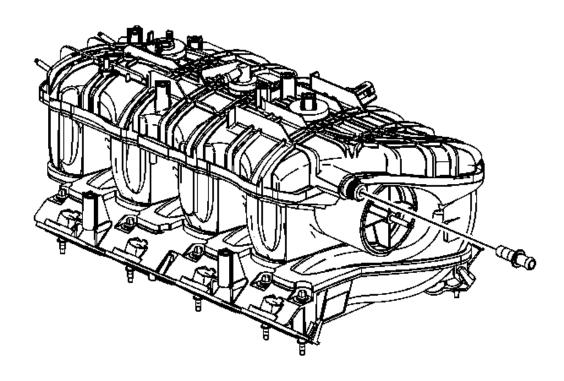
View Of Brake Booster Vacuum Hose Nipple Courtesy of GENERAL MOTORS CORP.
